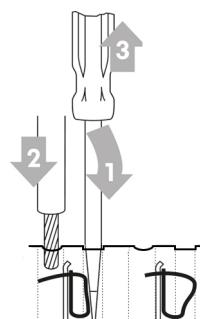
Connecting a Conductor to a CAGE CLAMP®
